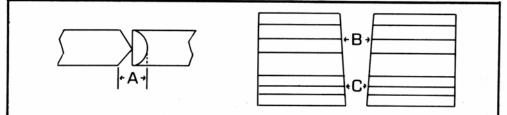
STARTING POSITION OF WELDING DIES. LENGTH OF PINCH CUT PLUS $\frac{1}{4}$ " EQUALS SPACE BETWEEN WELDING DIES. EXAMPLE: A = $\frac{1}{2}$ " A + $\frac{1}{4}$ " = B or C
